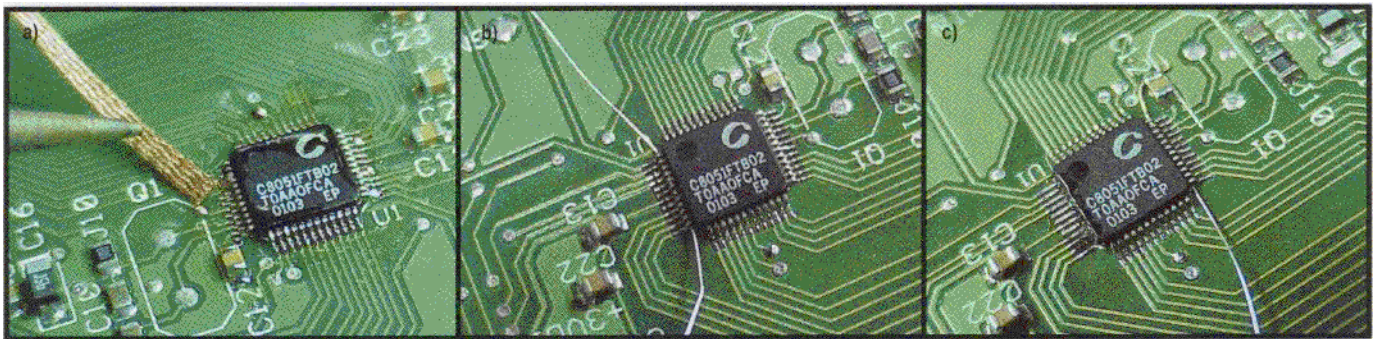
Apply solder flux and then wick the excess solder from the pins, b—Feed the stripped wire wrap wire behind and under the QFP leads. c—Anchor one end of the wire to a nearby component or via.
